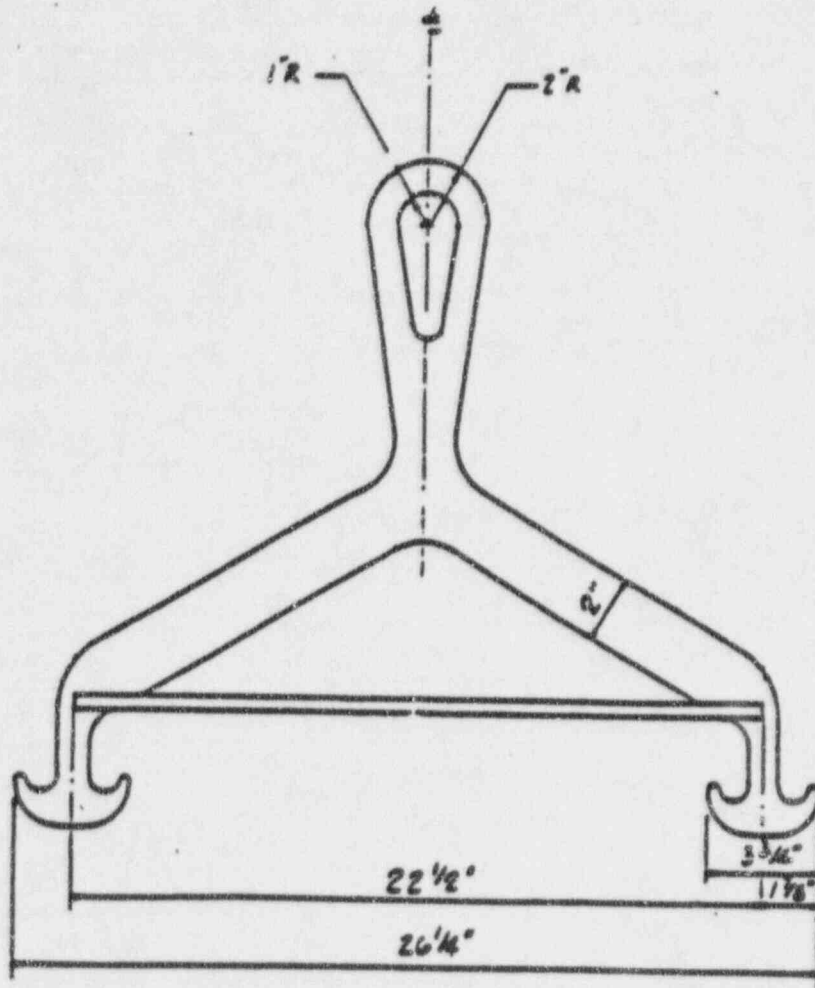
150 mm (6") Flange Gasket Lifting Yoke
